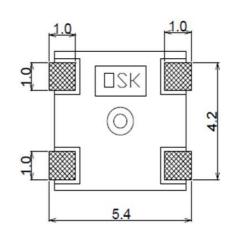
IN-PI55QATPRPGPBPW-XX Package Outline Dimensions
